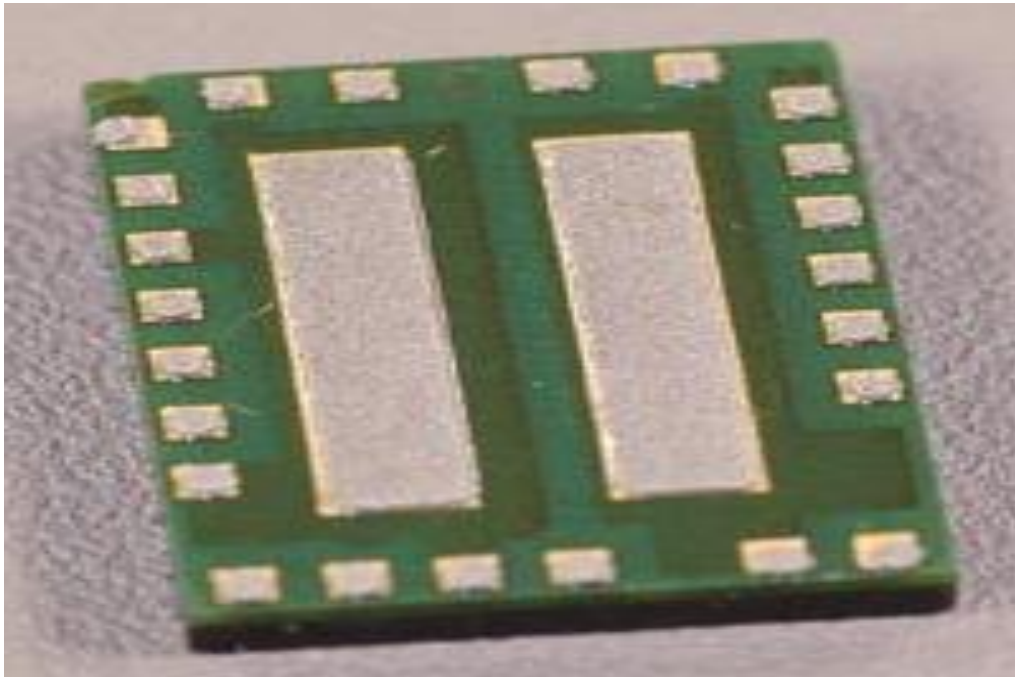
Solder paste printed on QFN before placement on PCB for rework
